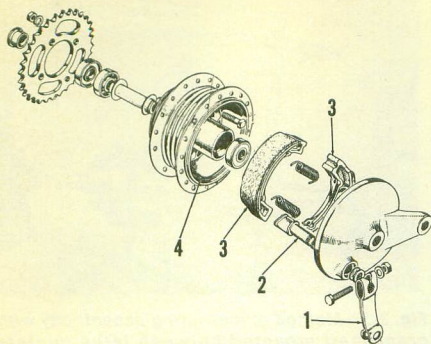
Exploded view of simple rear brake assembly. Front brake may be similar. Lever (1) is actuated by controls and turns cam (2) expanding shoes (3) against drum (4).
